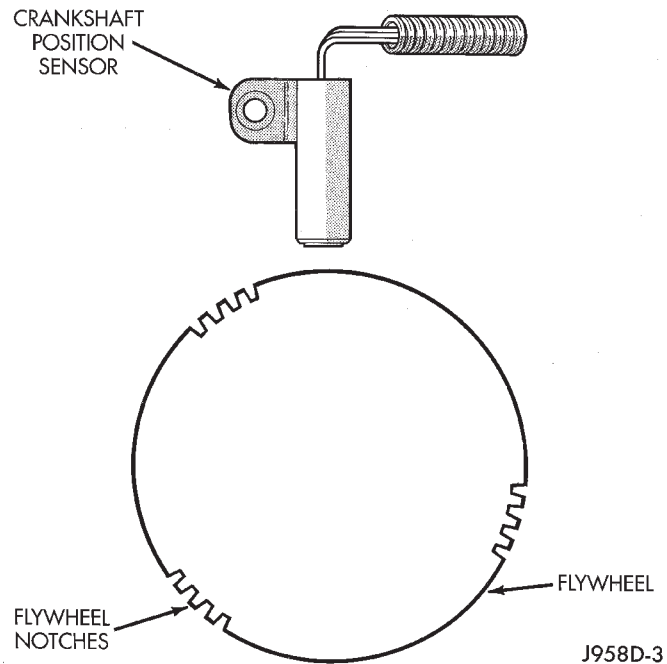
CKP Sensor Operation—4.0L 6-Cyl. Engine
